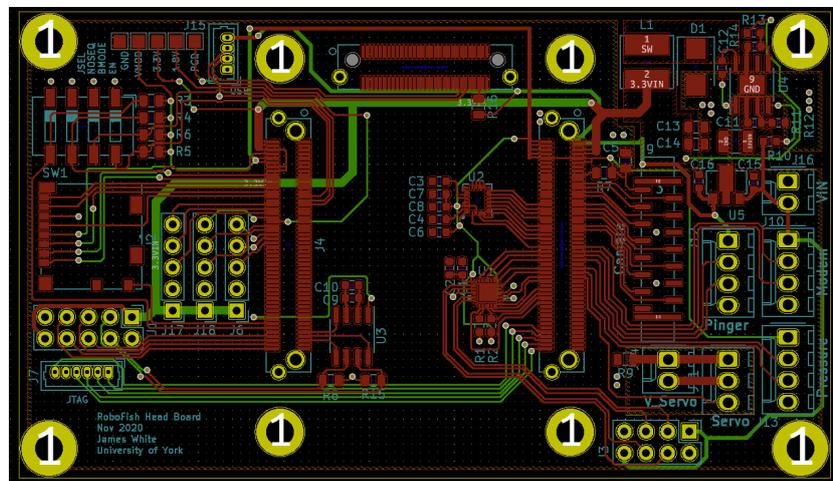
RoboFish Carrier Head board: a carrier PCB designed to contain all of the necessary hardware for interfacing the TE0720 SoM with the rest of RoboFish, programming the SoM and Regulating DC supplies; Either MIPI CSI-2 connector and USB is used for camera interfacing. SD card slot is provided; Either CAN or Ethernet is used for communication; LSM9DS1 IMU is used to provide orientation awareness.
